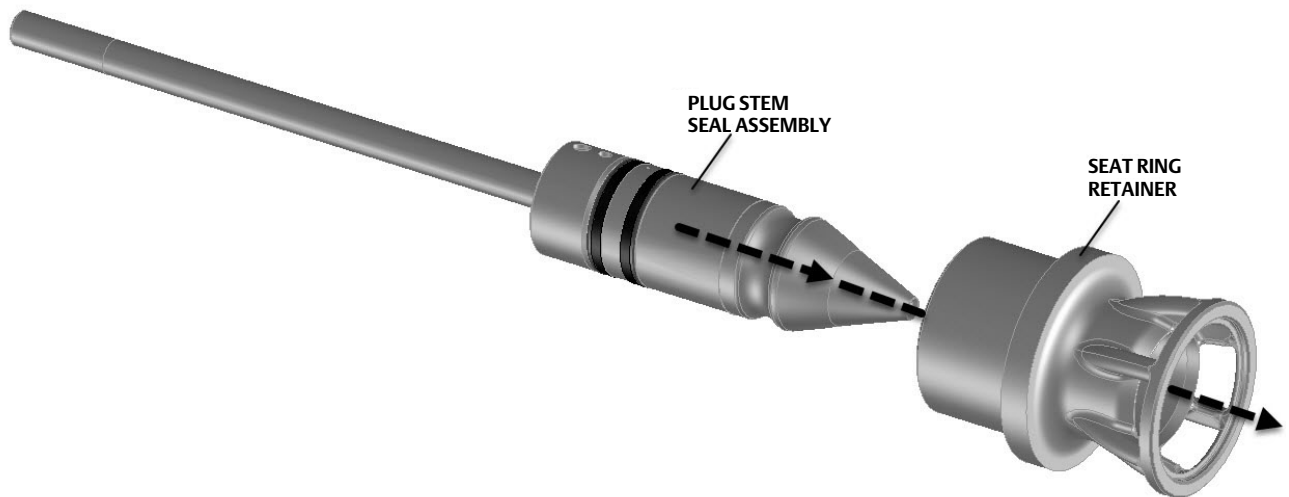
CCV NPS 4 Assembly - Insert of Plug Stem Seal Assembly through the Bottom of the Seat Ring Retainer
